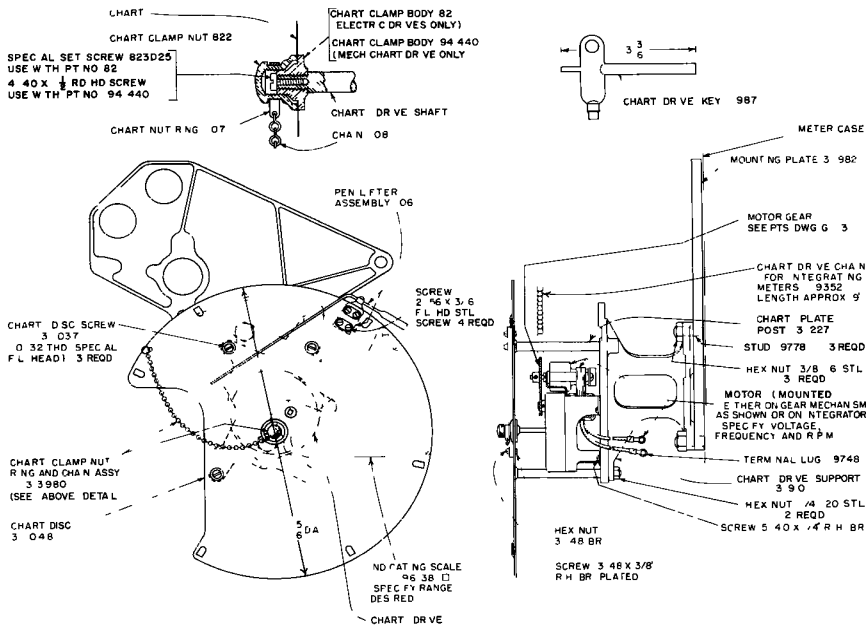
Parts Drawing G92 35, Chart Plate and Chart Drive
